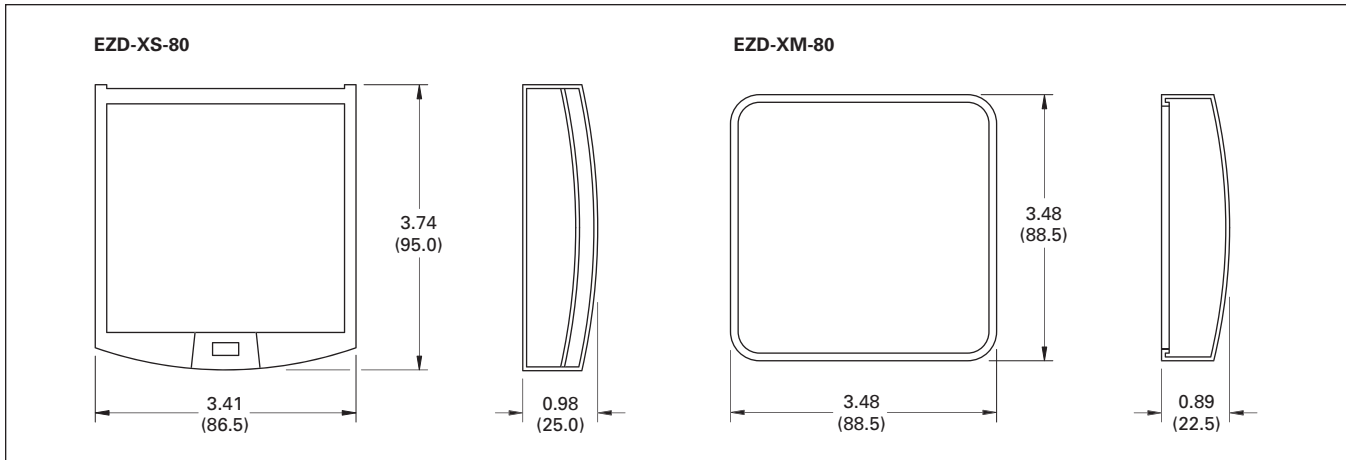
EZD-XS-80 and EZD-XM-80 Series Dimensions in Inches (mm), Drawing Number MD05013009E
